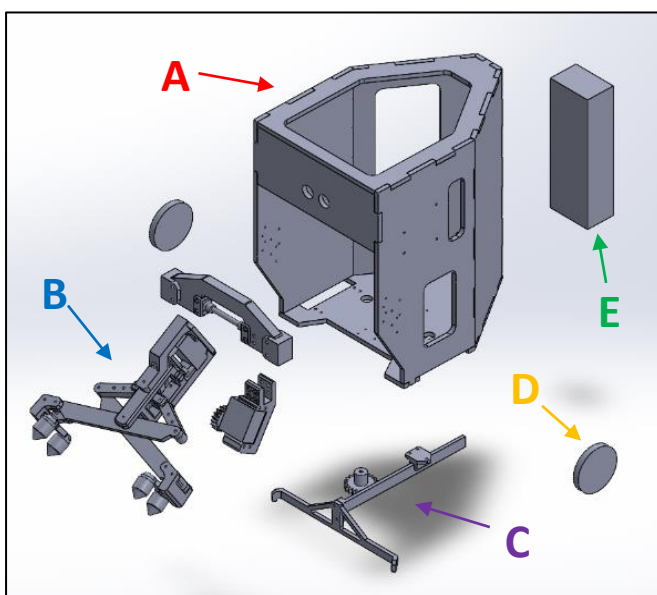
Exploded view showing the major sub-systems of *Boulder
